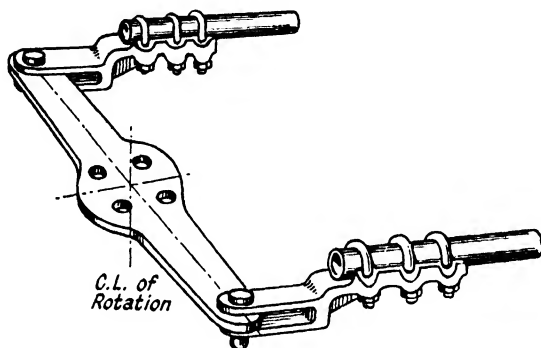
END DETAIL OF PHASE INTERCONNECTING ROD FOR LARGE SWITCHES USING TUBES IN TENSION AND CLAMP FITTINGS
